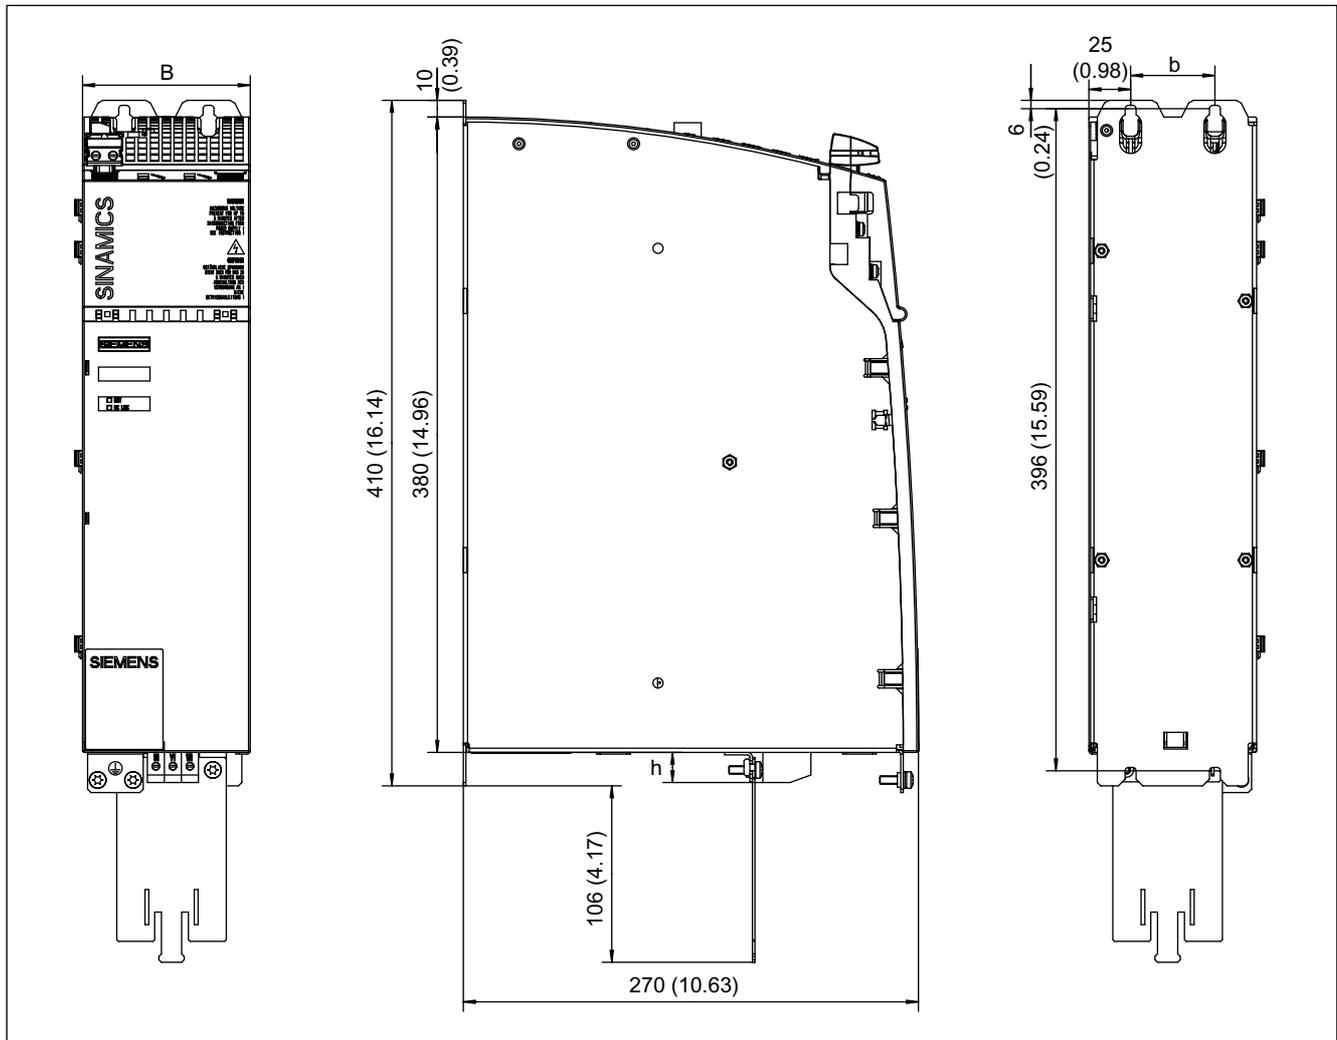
Dimension drawing of Active Line Module 16 kW with internal air cooling, all data in mm and (inches)
